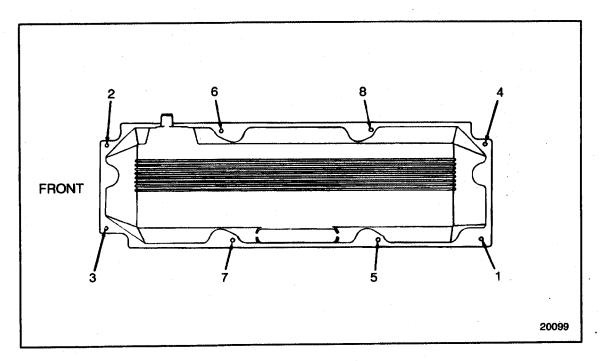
Rocker Cover Bolt Tightening Sequence
